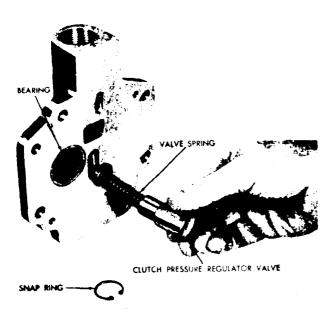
C-29. Removing (or Installing) Clutch Pressure Regulating Valve
